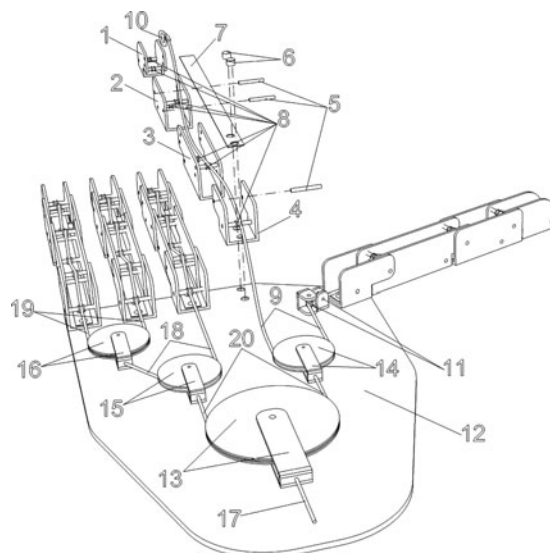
The assembly of prosthetic hands, and exploded view of a finger.
